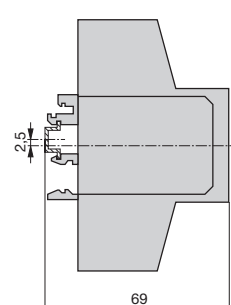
SINEAX 211 for mounting on cap-type rail, EN 50 045-15 x 5.5.
